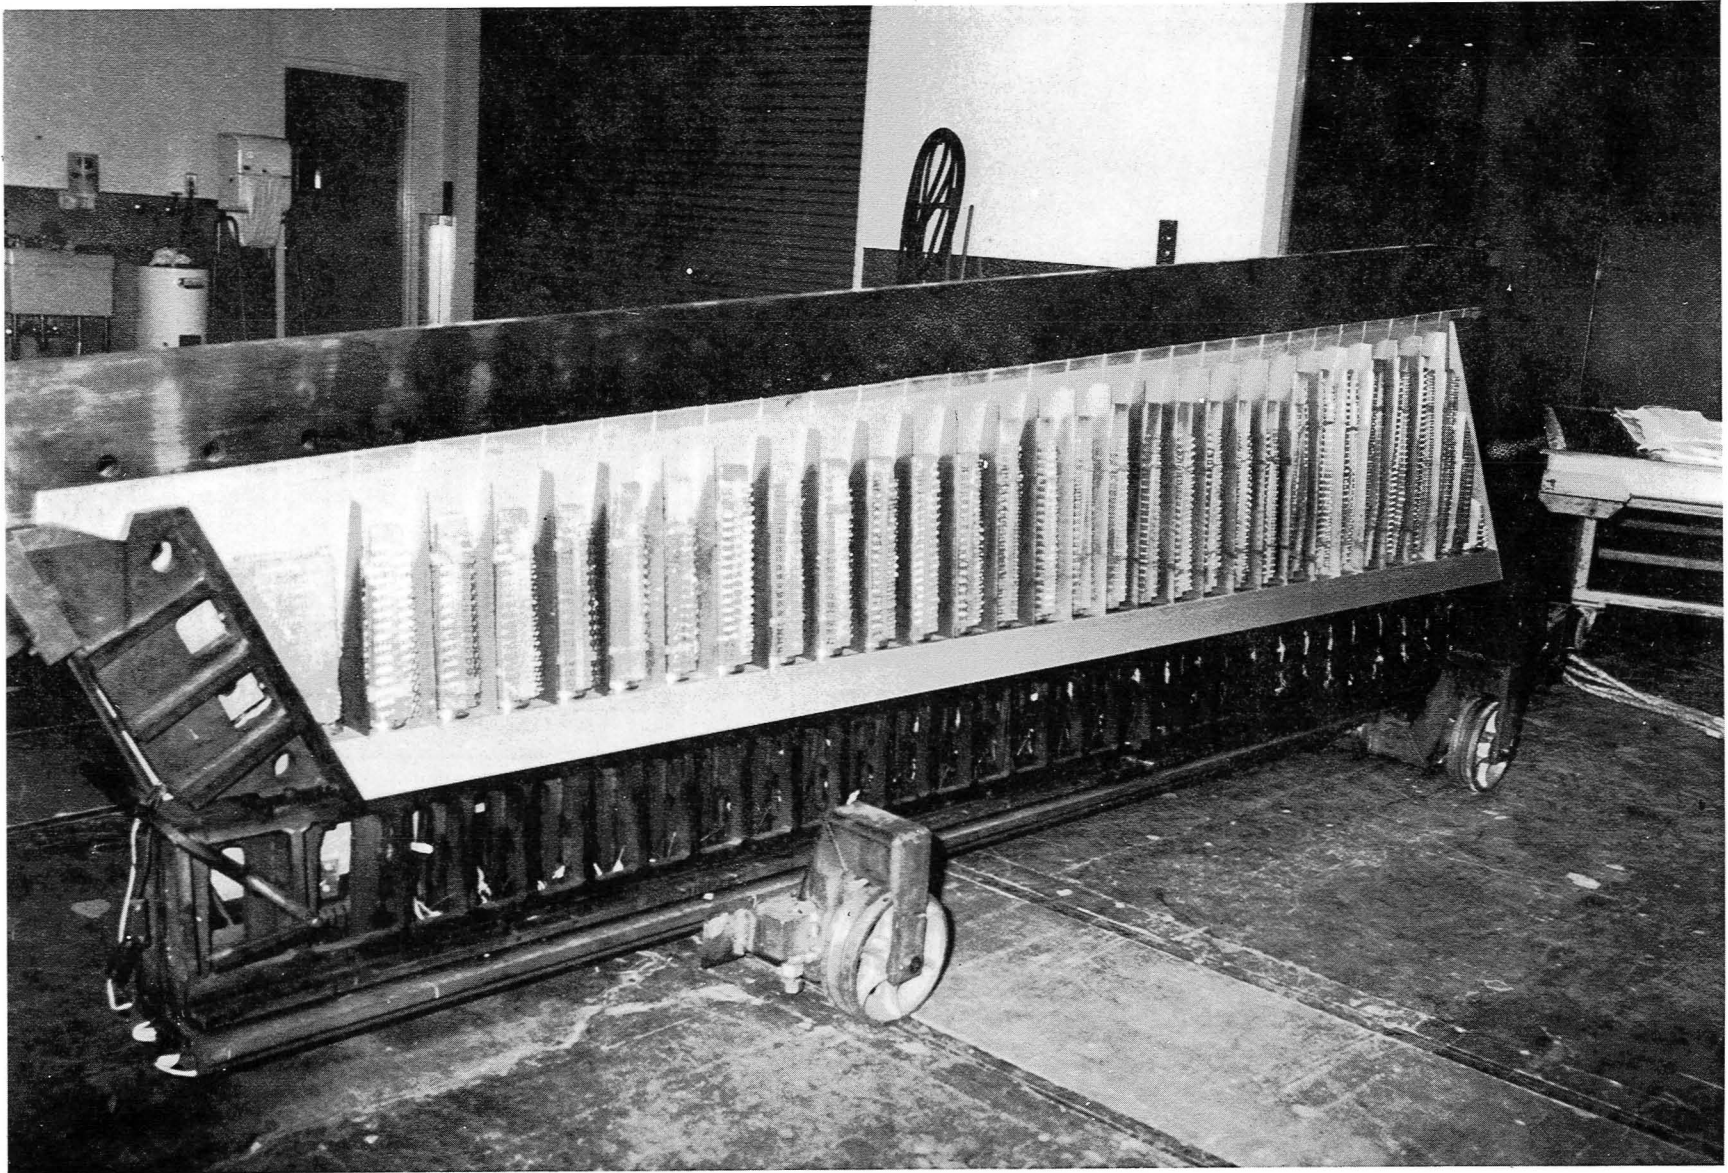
VIEW OF R/H DUMMY SKIN, DUMMY RIBS, METAL MANDREL F/S FORWARD FLANGE RUBBER
